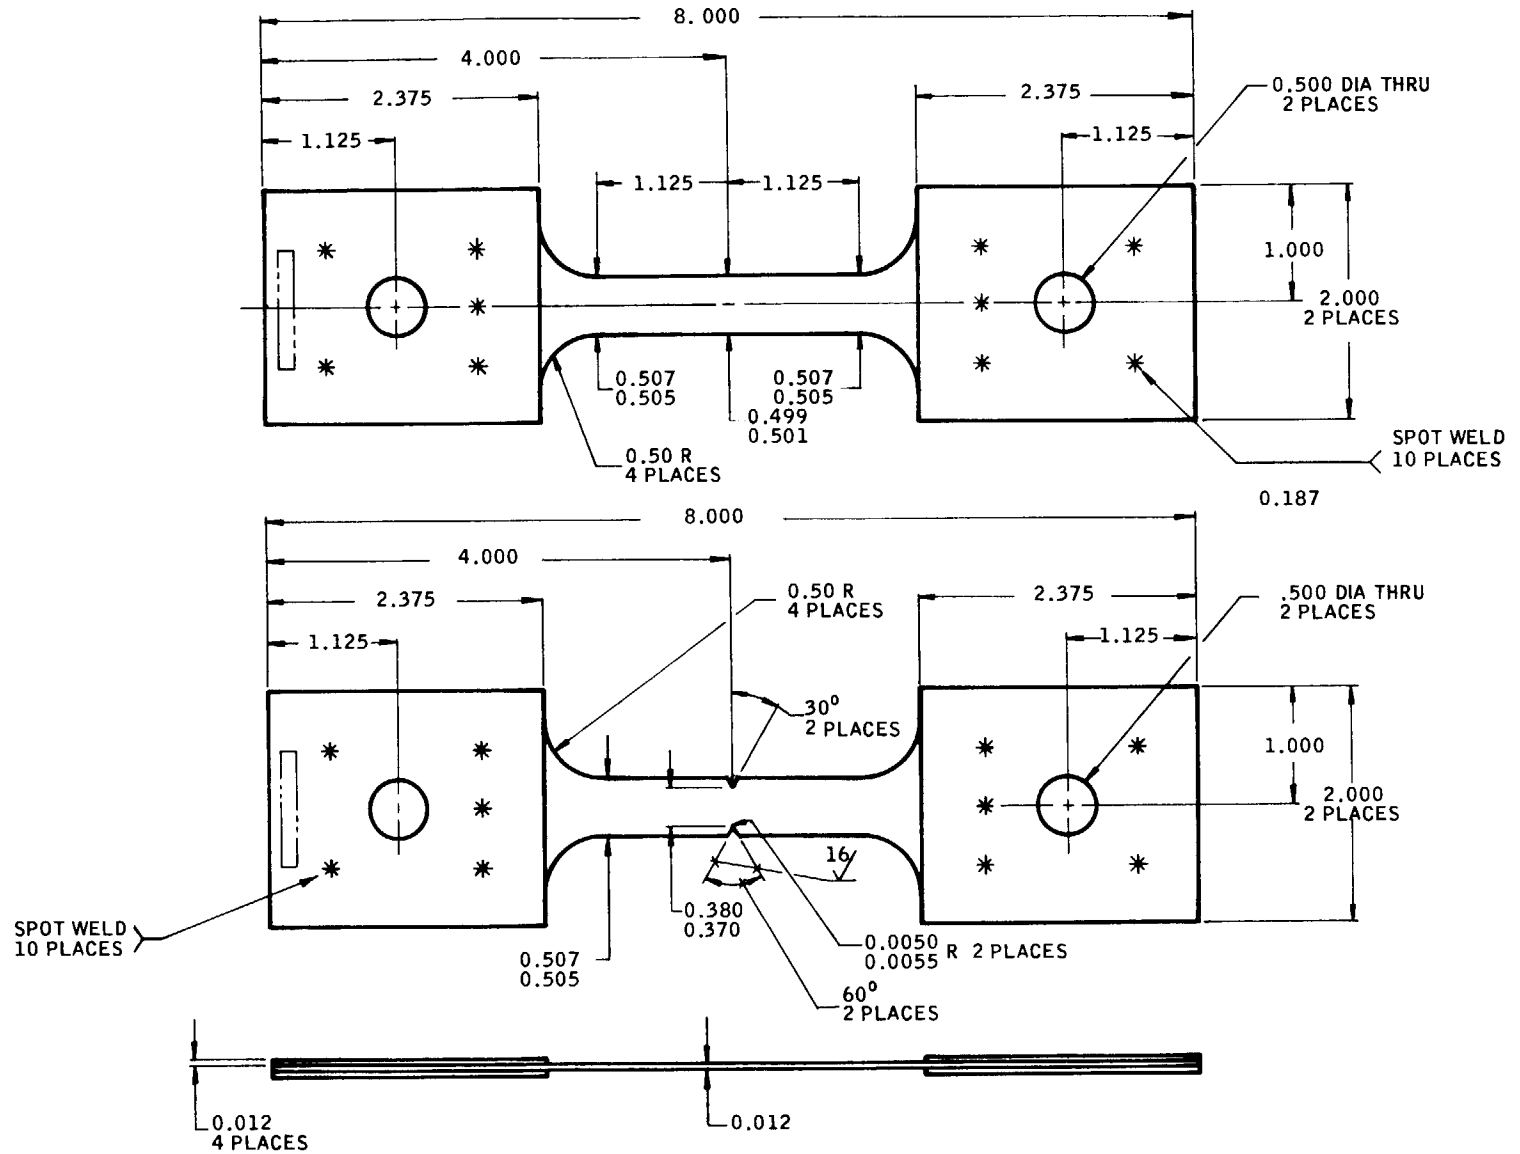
Sample Plan Specimen Layout for Welded Ring Forging, Heat 261-5-4000
